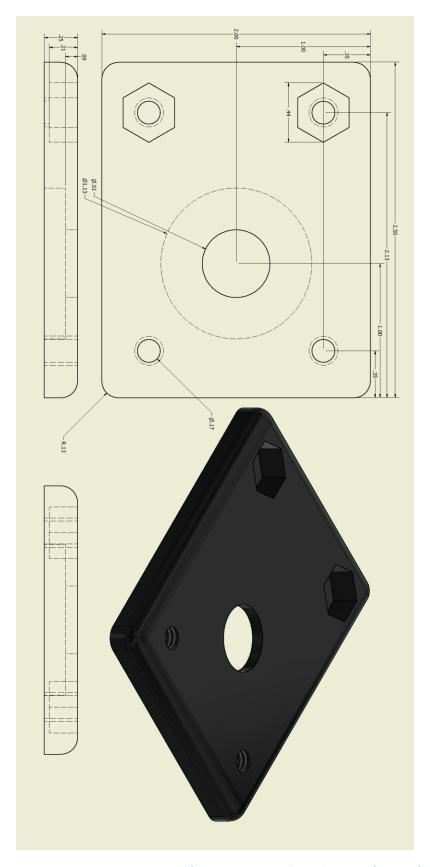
Arm Segment 1 Lower Half Bearing Cover Mechanical Drawing (Units: in)
